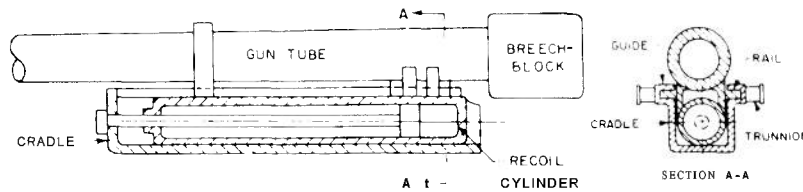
U-Type Cradle With Attached Recoil Mechanism
